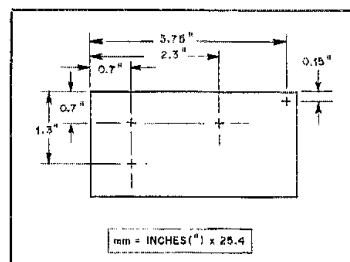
If the circuit-board pattern shown in Fig. 8 is followed this drilling template can be used to locate the mounting hole and holes for the LED indicators.
